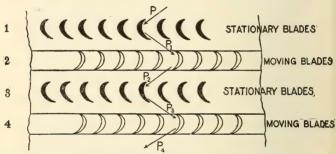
Sectional View of Four Rows of Blades, of a Westinghouse-Parsons Turbine.
